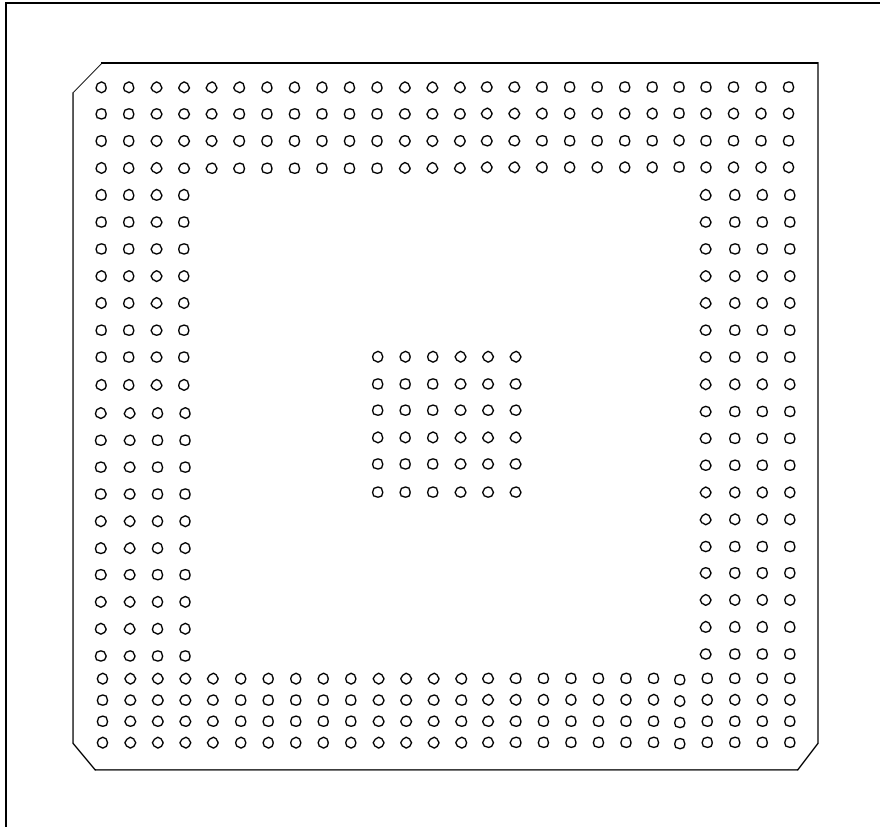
352-Lead Ball Grid Array Package - Bottom View
